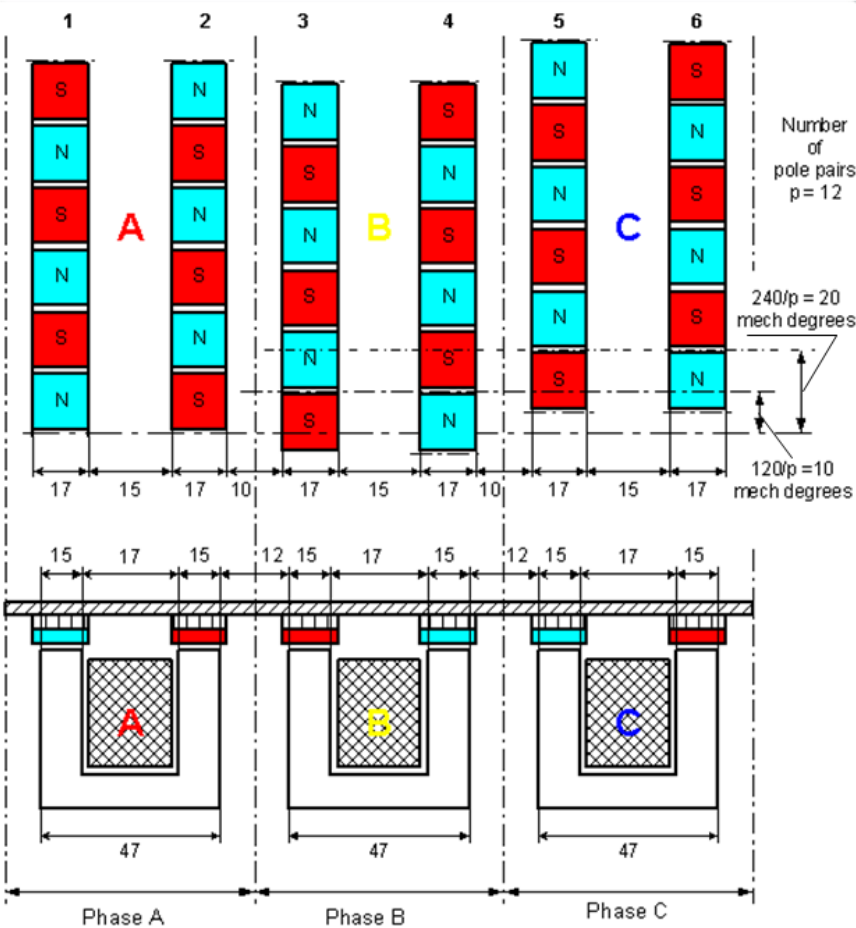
PM axial layout for 3-phase machine structure [29]
